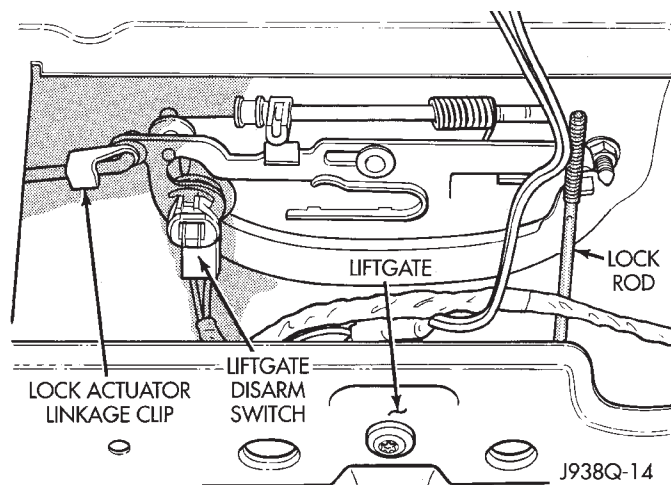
Liftgate Lock Cylinder Switch Remove/Install
